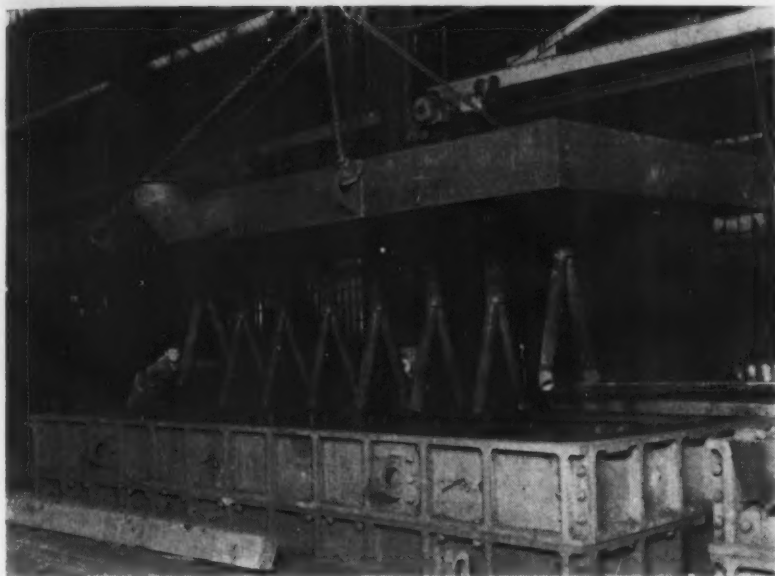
Spacer containing duct work for drying being lowered into the mold.
